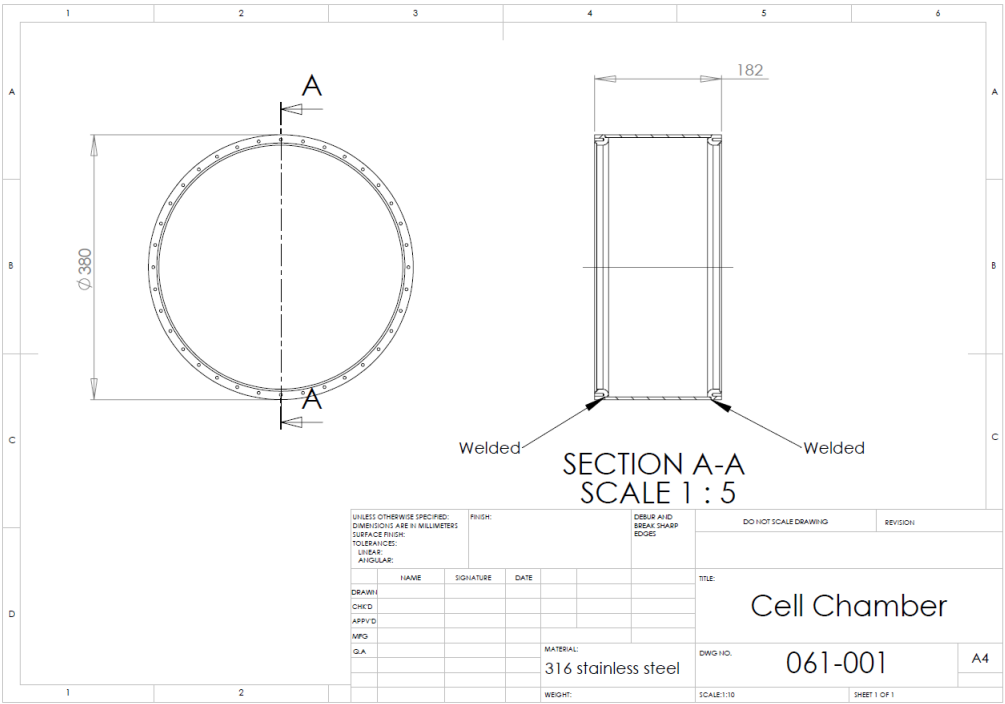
Drawing of the SV without the lids. Chamber walls have two flanges welded in place for an indium seal with the lids to create a vacuum tight environment.
